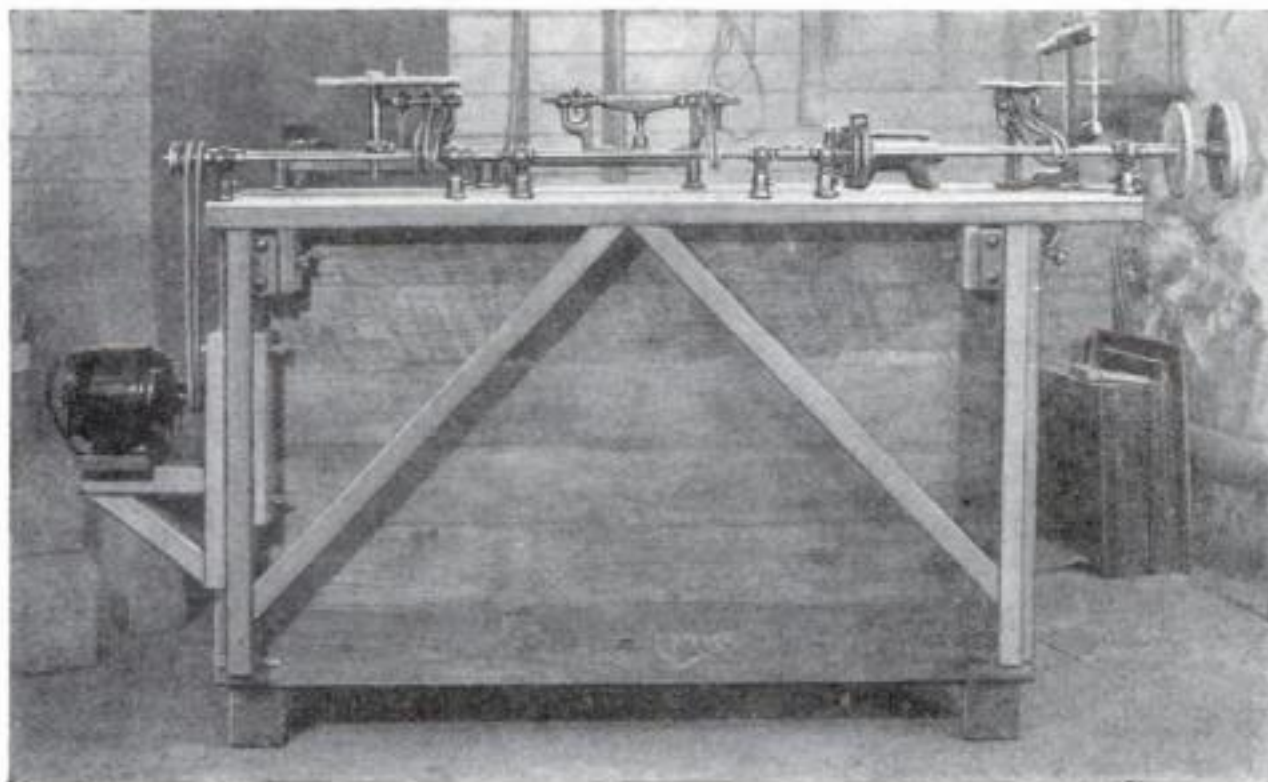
The shafting and motor are mounted on a special framework hinged to the back of the bench. The frame can be swung back as much as 2 in. to adjust the tension on the belts.
